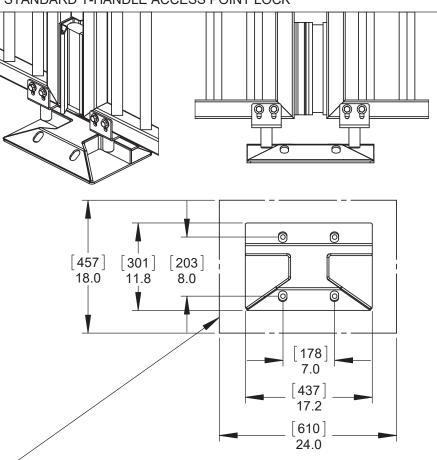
STANDARD T-HANDLE ACCESS POINT LOCK
